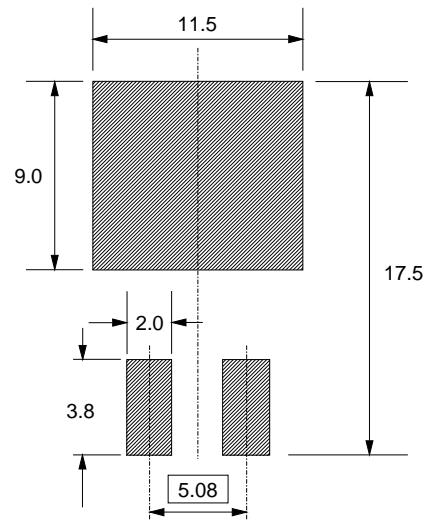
SOT404 surface mounting package. Centre pin connected to mounting base.
